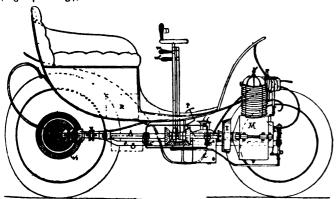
SECTIONAL ELEVATION OF "TAUZIN" VOITURETTE.
